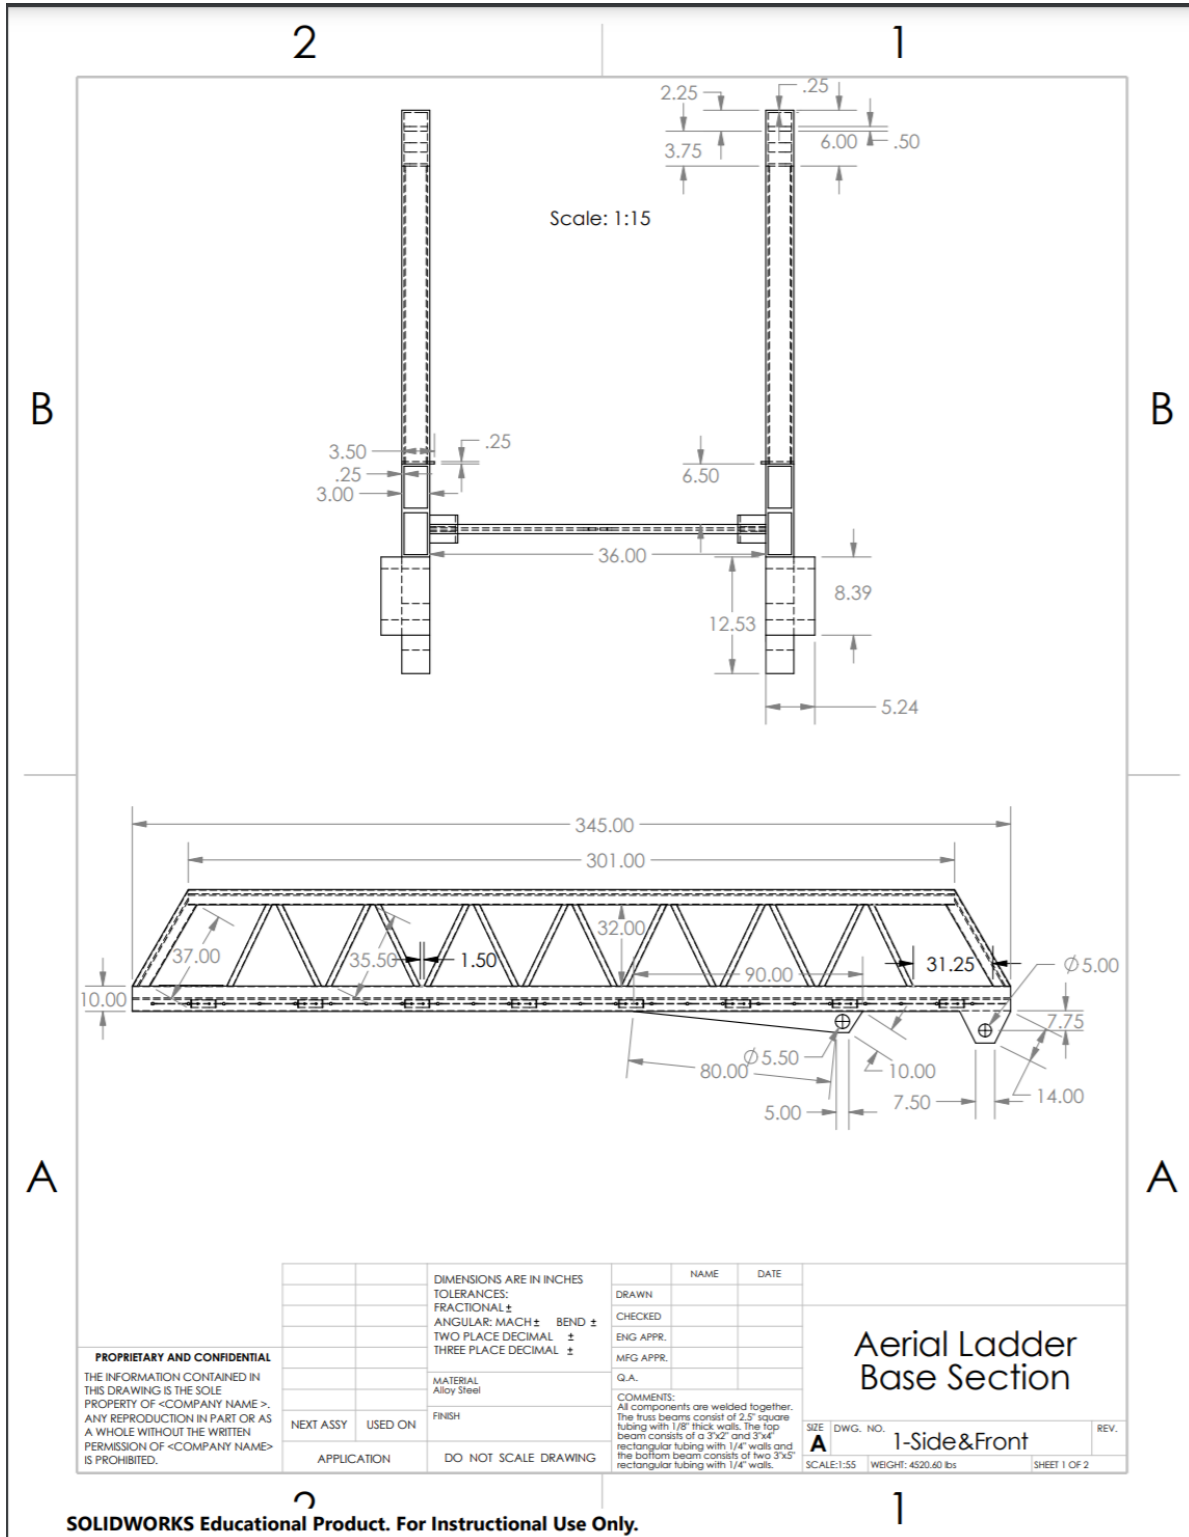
Side and Front Views of the Dimensioned Drawing of the Base Section of the Aerial Ladder
